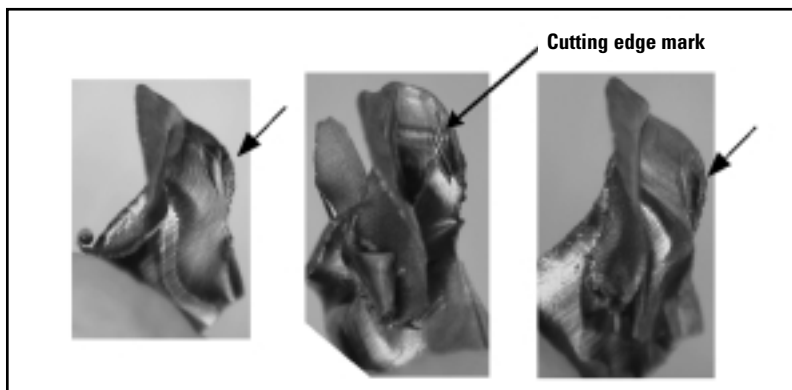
Cutting edge marks found on the same position of chips, observed under dry cutting.
